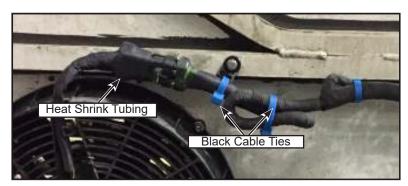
Cut Cable Ties on Harness Side Wiring and Remove Heat Shrink Tubing on Delphi Connectors
